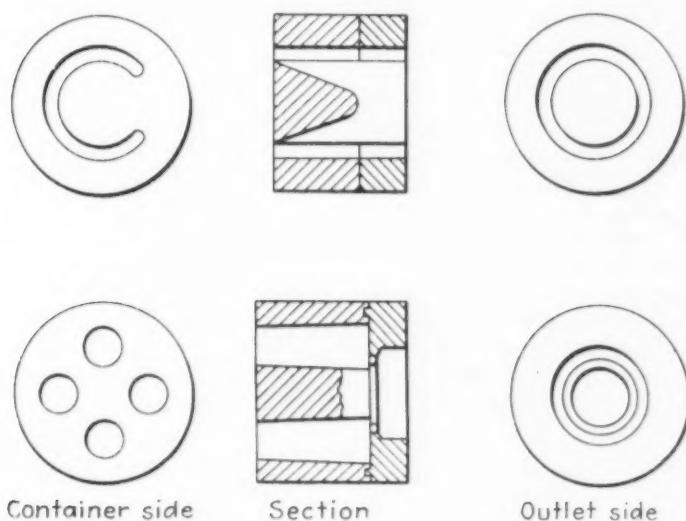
Compound dies for tube extrusion. (Above) elementary form. (Below) patented design.
